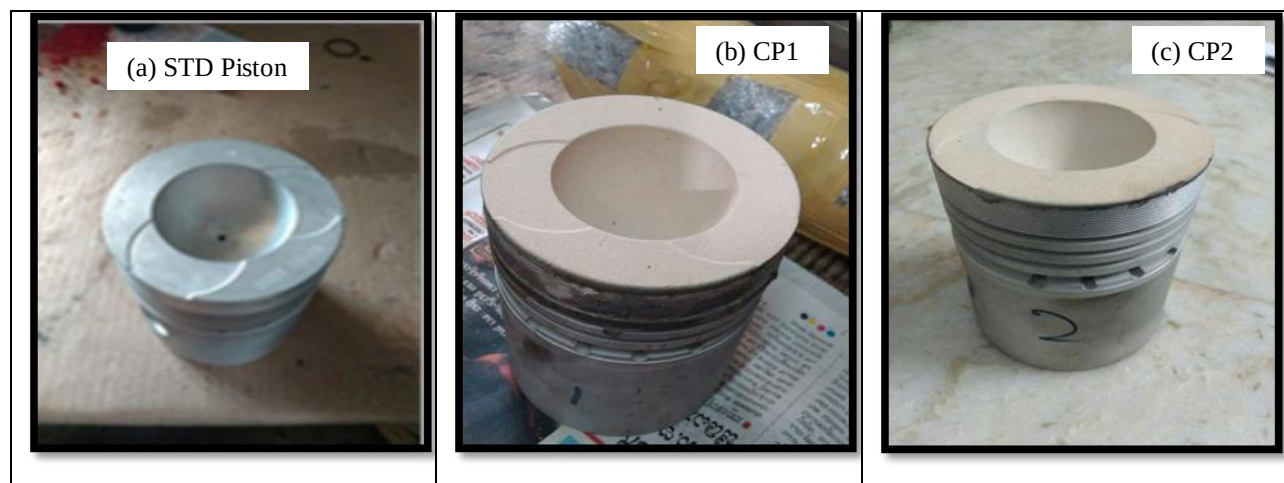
(a) photographic view of uncoated STD engine piston and (b, &amp; c) Coated pistons
